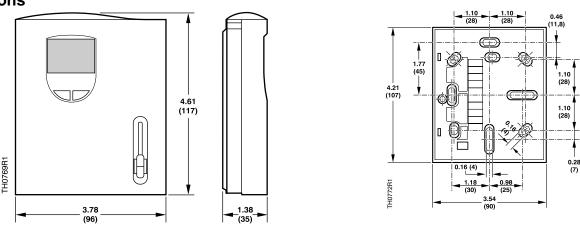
Controller and Base Plate Dimensions in Inches (Millimeters).
